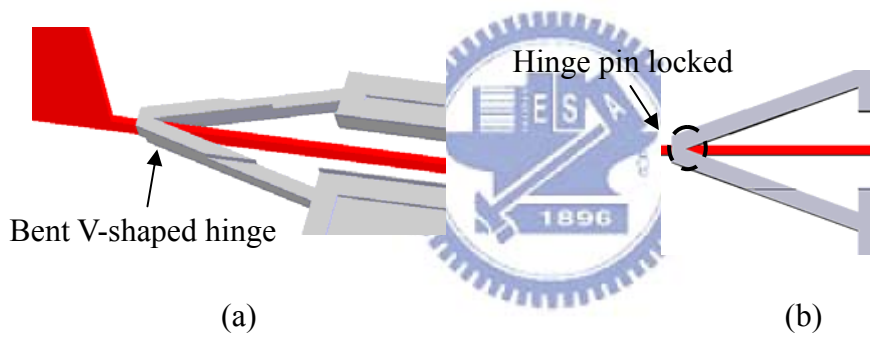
(a) Schematic view of the V-shaped hinge after assembly, (b) top view.
